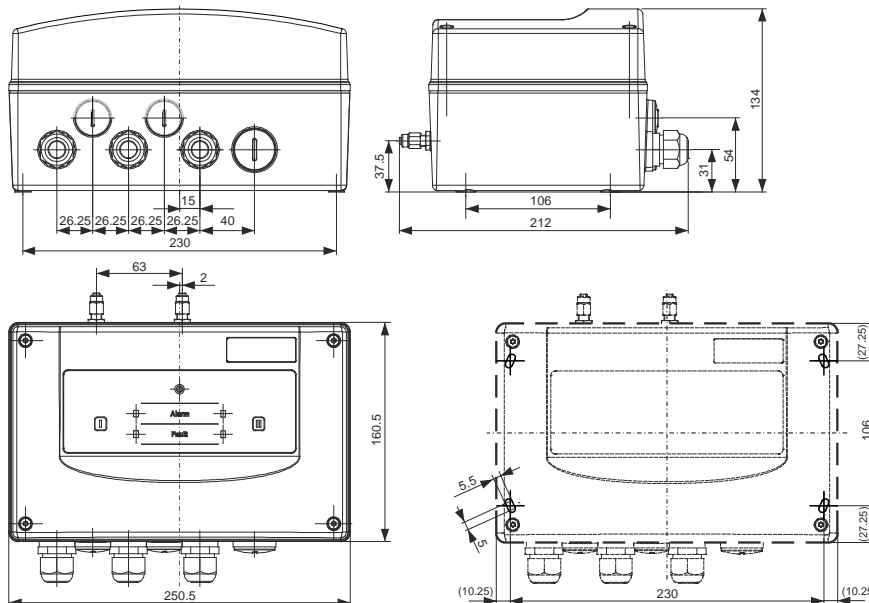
Dimensioned drawing, drilling plan for cable terminal processor
